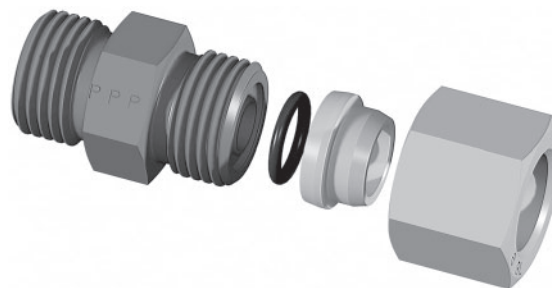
Seal-Lok Fitting Body, O-ring, Sleeve and Nut
